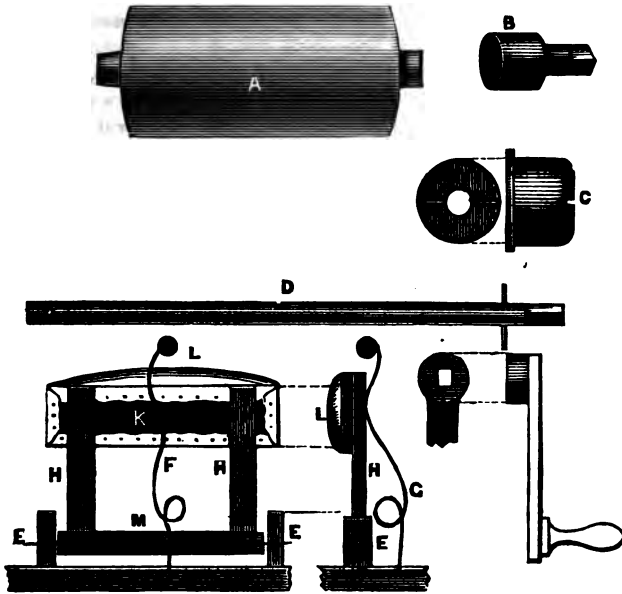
DETAILS OF ELECTRICAL MACHINE.
